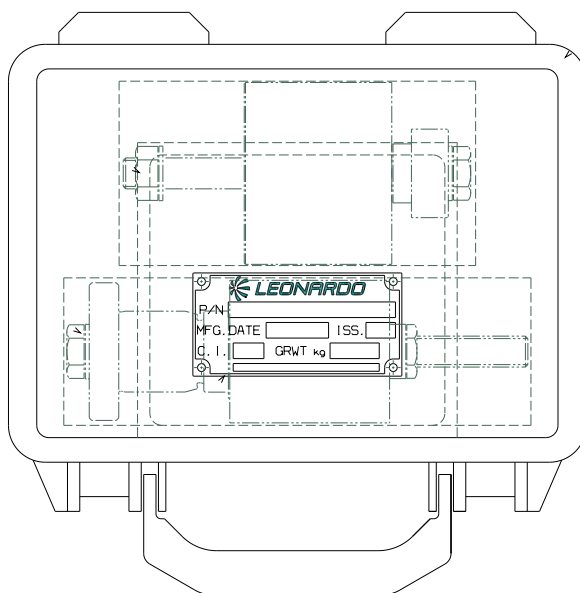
Tool kit, M/R flanged bushing rem / instl.
